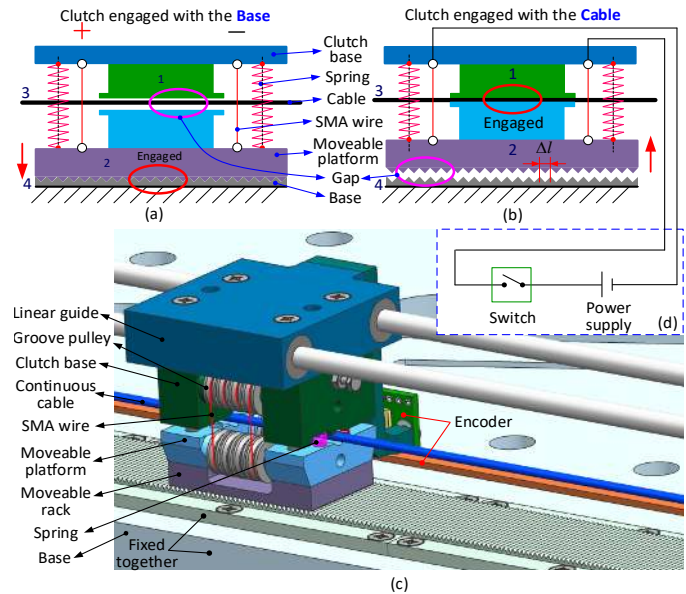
Concept and working principle of the proposed SMA wire-based clutch. a) clutch engaged with the base; b) clutch engaged with the cable; c) design of SMA clutch and winding of SMA wire; d) control schematic for SMA clutch
